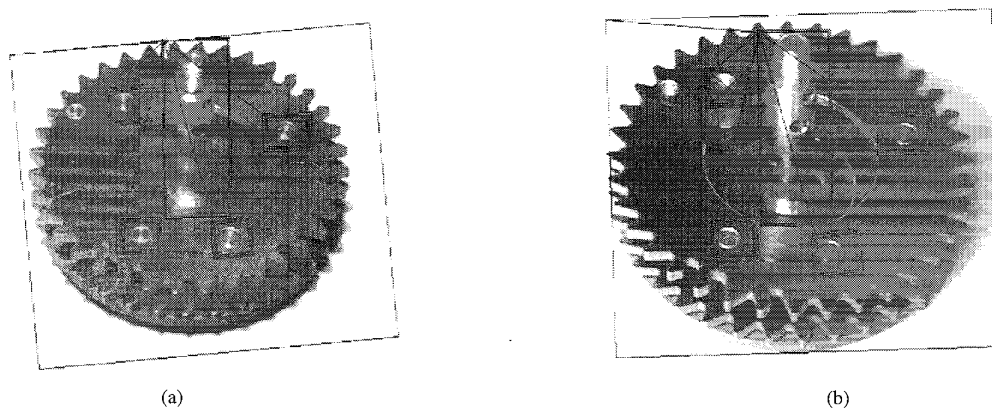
Test images for gear assembly. (a) correctly assembled part; (b) misassembled part.
